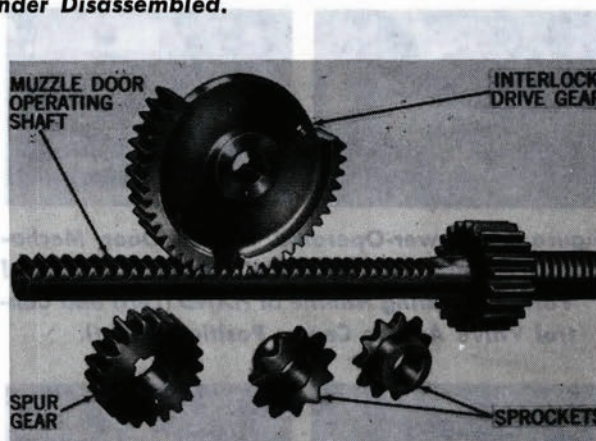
Breech End of Muzzle Door Operating Shaft With Gears and Sprockets for Interlock Chain.
